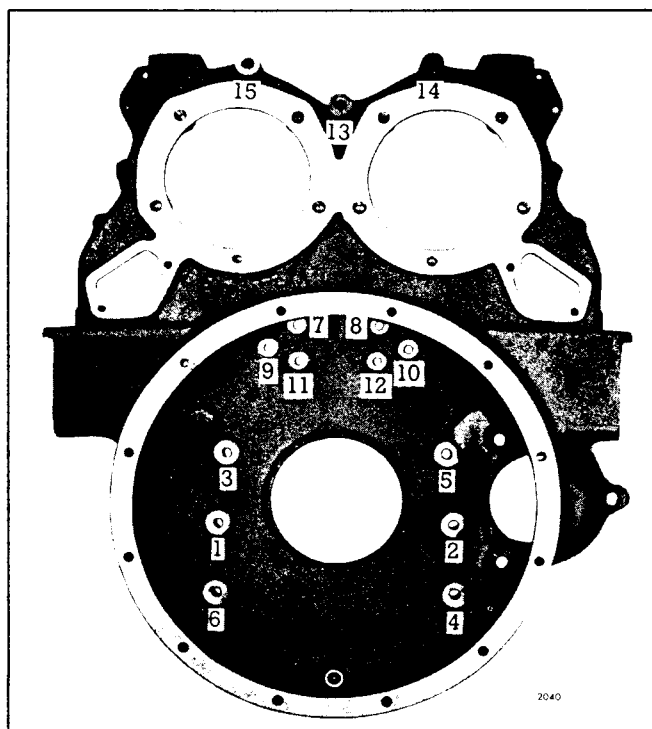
Flywheel Housing Bolt Tightening Sequence (Operation 2)--In-Line Engine
